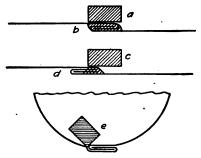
Soldering Flat-Locked Seams; an Improper Method of Placing the Copper Is Shown at e.
